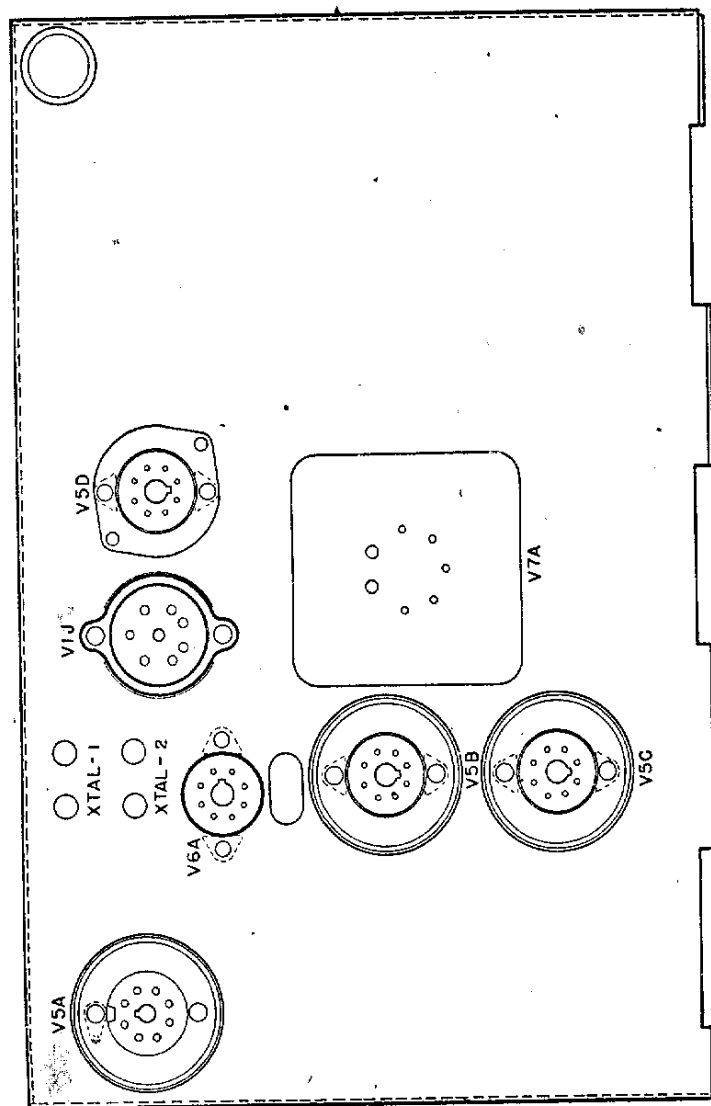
Top View of Sender Valve and Crystal Sockets.
